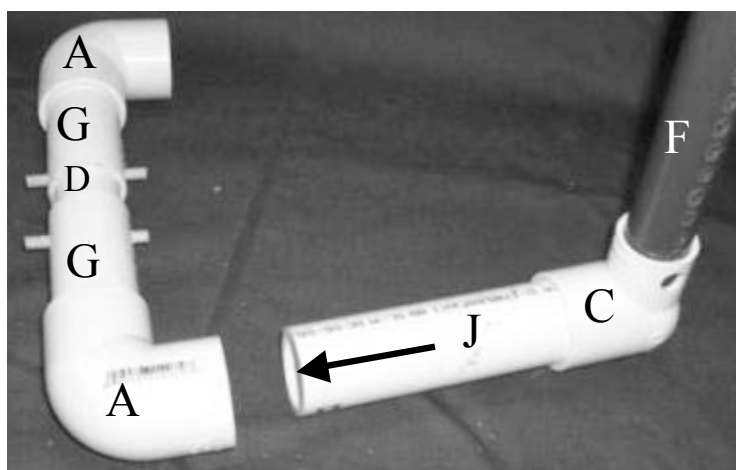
Step 16 – Joining Side Frame to Rear Frame.
